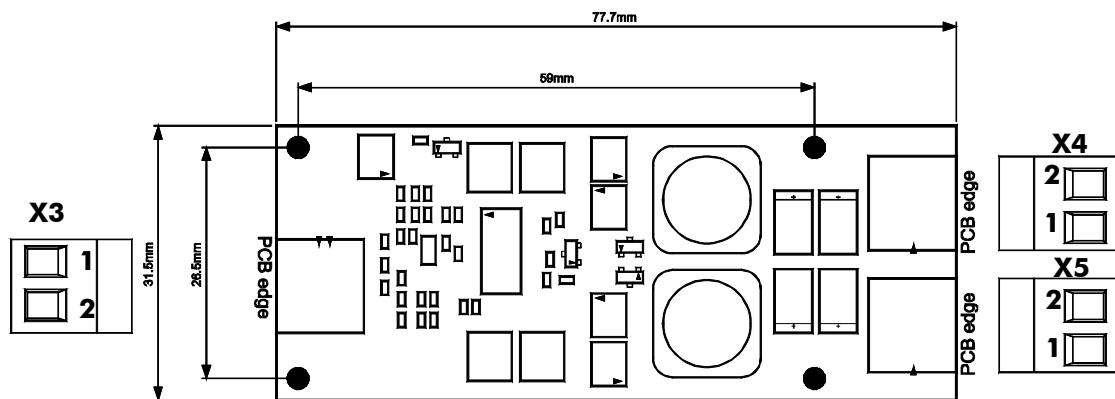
Mechanical Drawing Screw terminal version (optional): top view
